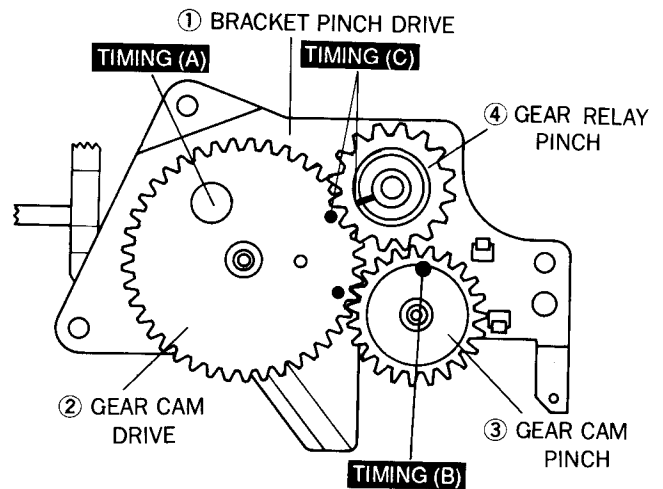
Timing of Gear Cam Drive, Gear Cam Pinch & Gear Relay Pinch
